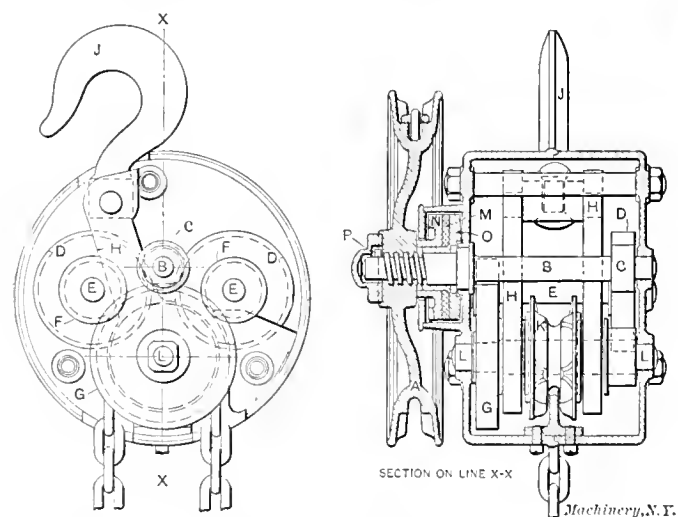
Mechanism of the Imperial Hoist, showing Improved Brake and Suspension
